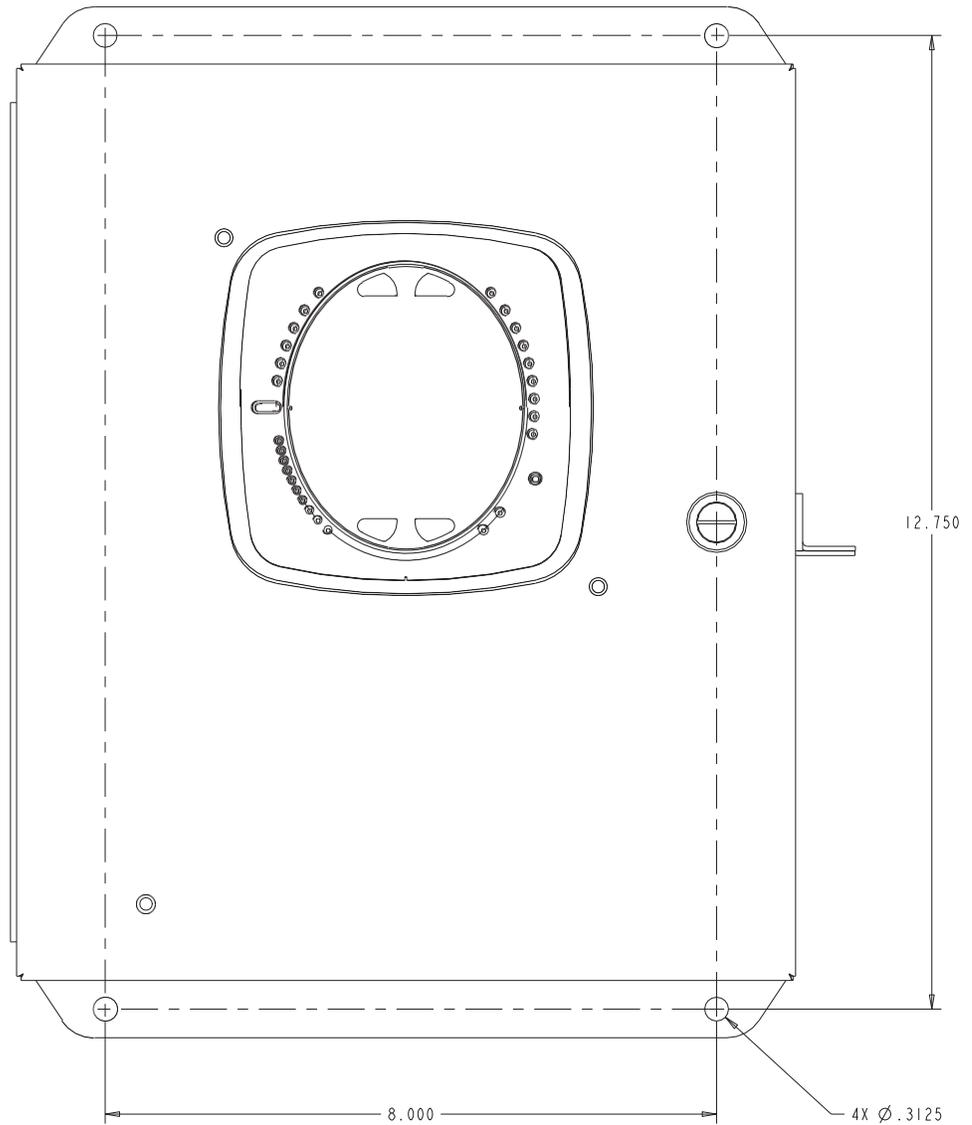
NEMA 1 Mounting Hole Dimensions
